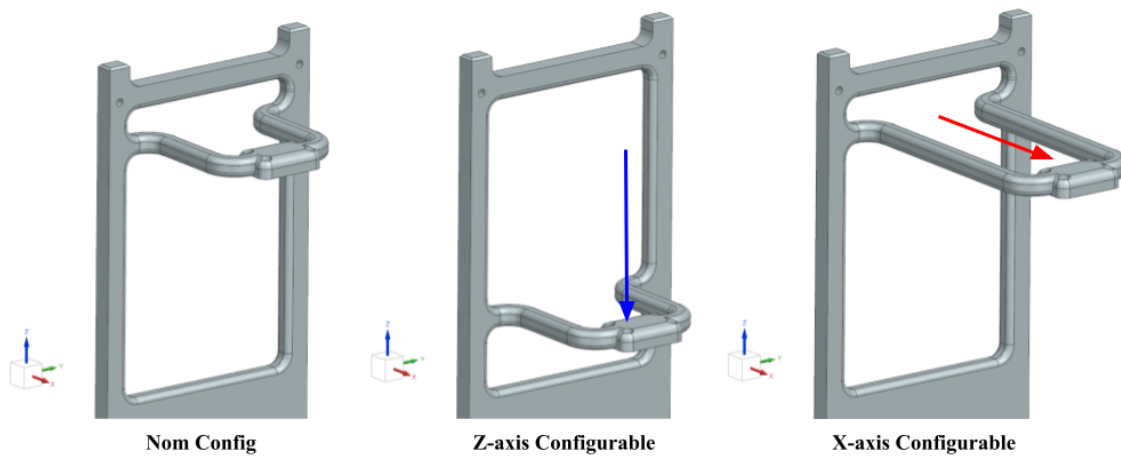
Versatility of 3D Printed Heat Pipe Structure
